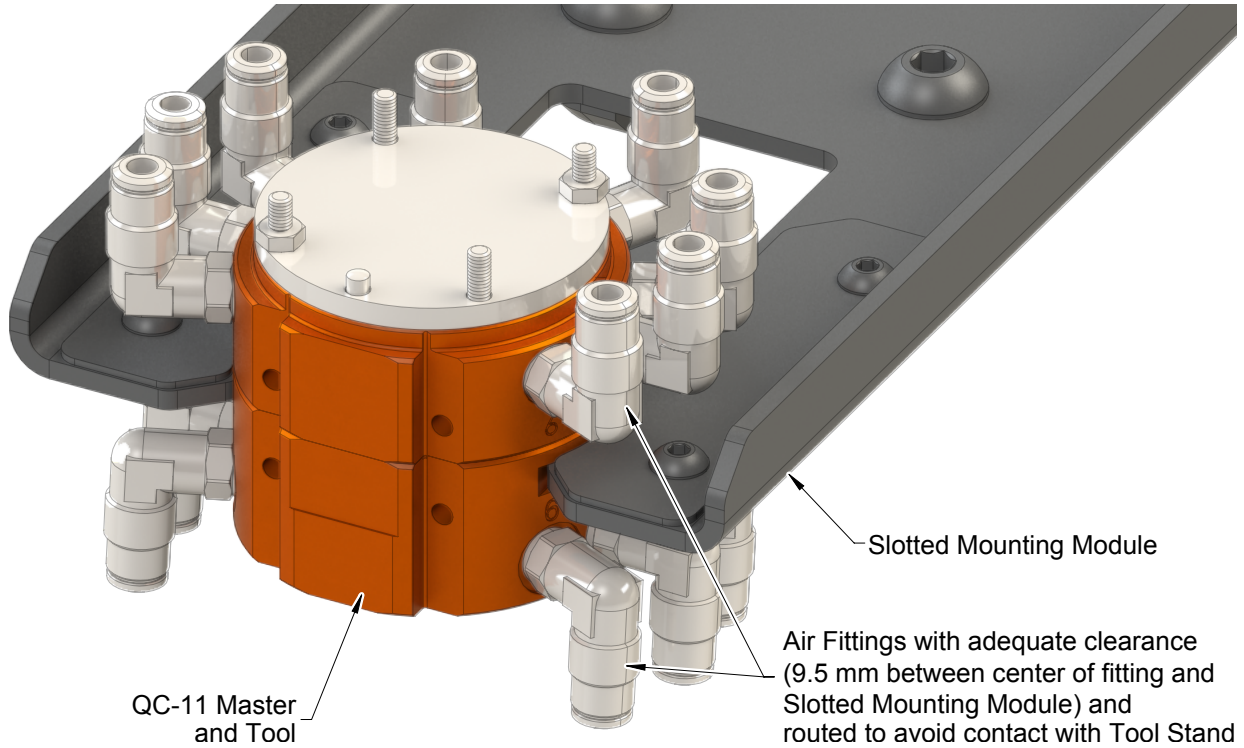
Installing TSS Tool Stands with Slotted Mounting Modules (QC-11 Shown)
